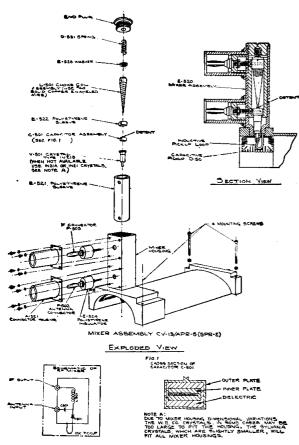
BuShips drawing RE 100F 2006 (rearranged).
